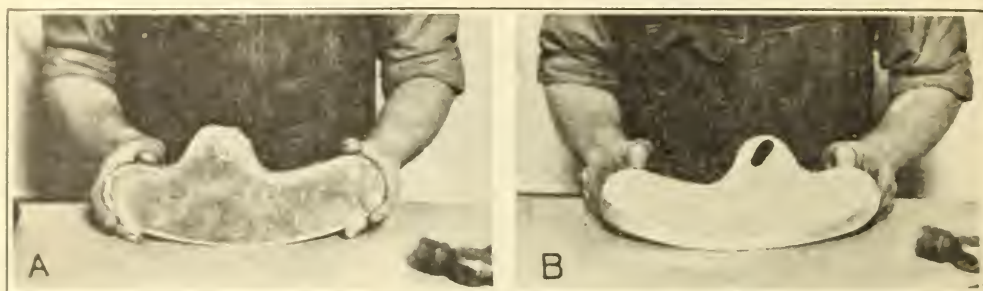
Making the blade, low-cutting hand knife. *A*, Upper side of roughed-out blade; *B*, under side of finished blade
